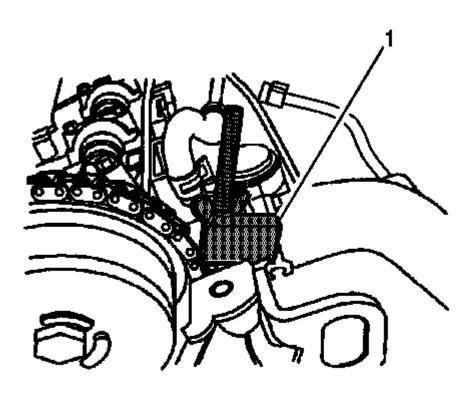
Valve Seal & Removal Tool Courtesy of GENERAL MOTORS COMPANY
